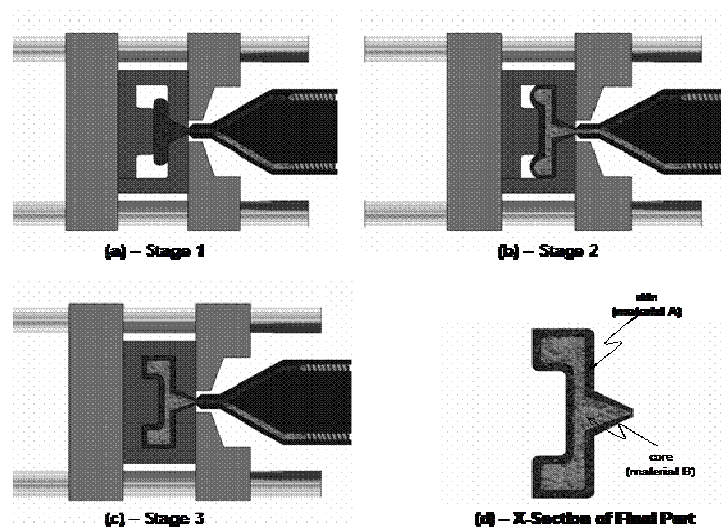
Sandwich molding machine with a common nozzle and switching head [14]
